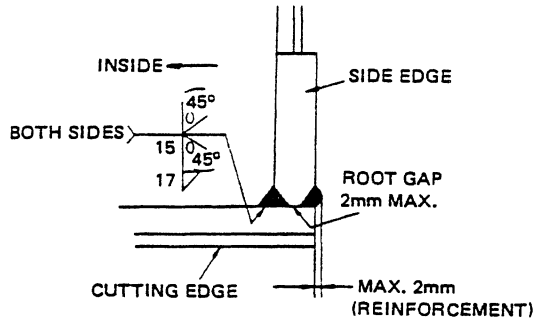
Weld Build-up Cutting Edge and Side Edge
